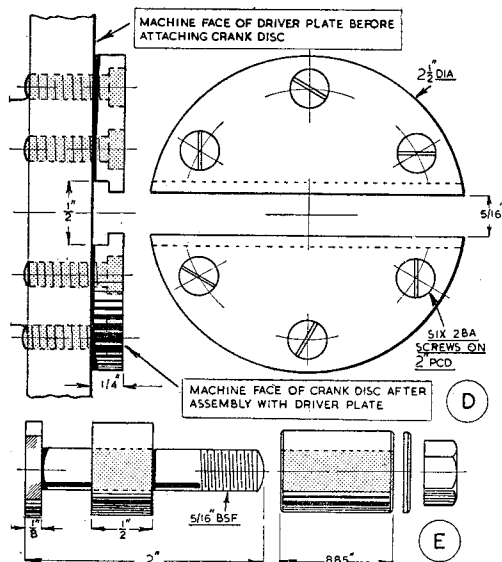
Showing details of the driver plate ("D") and the crankpin assembly ("E")
